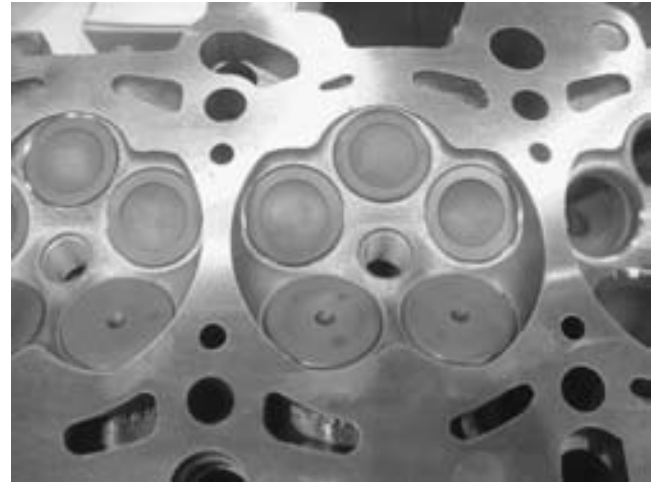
An Audi five-valve cylinder head, which uses three intake valves and two exhaust valves.
